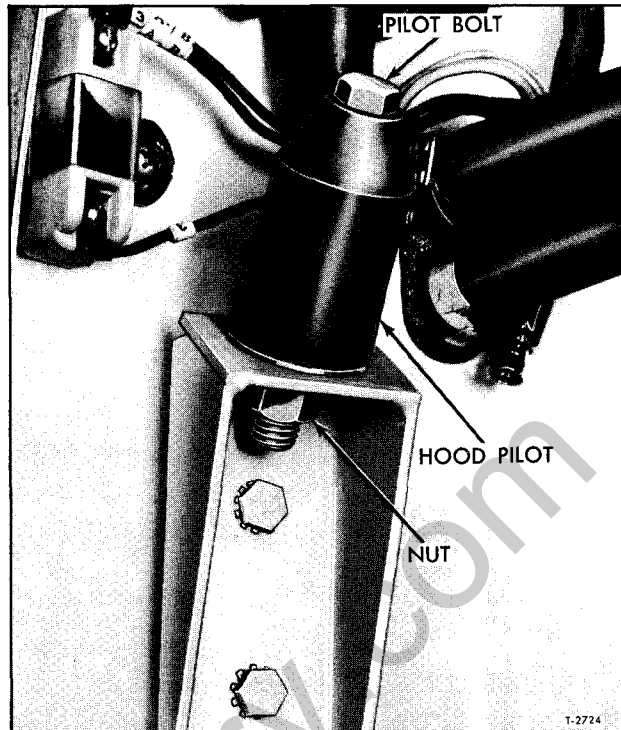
Hood Mounting Adjustment at Cab Cowl (H and J Models Shown)
